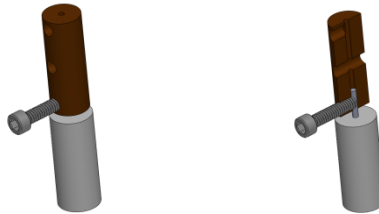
Picture showing SolidWorks assembly. Whole and partial views of the second setup. DC mass eccentric motor plus off-balance load which consists of one 2/56” screw and coupling. This assembly was designed to create a low vibratory effect to our system.
